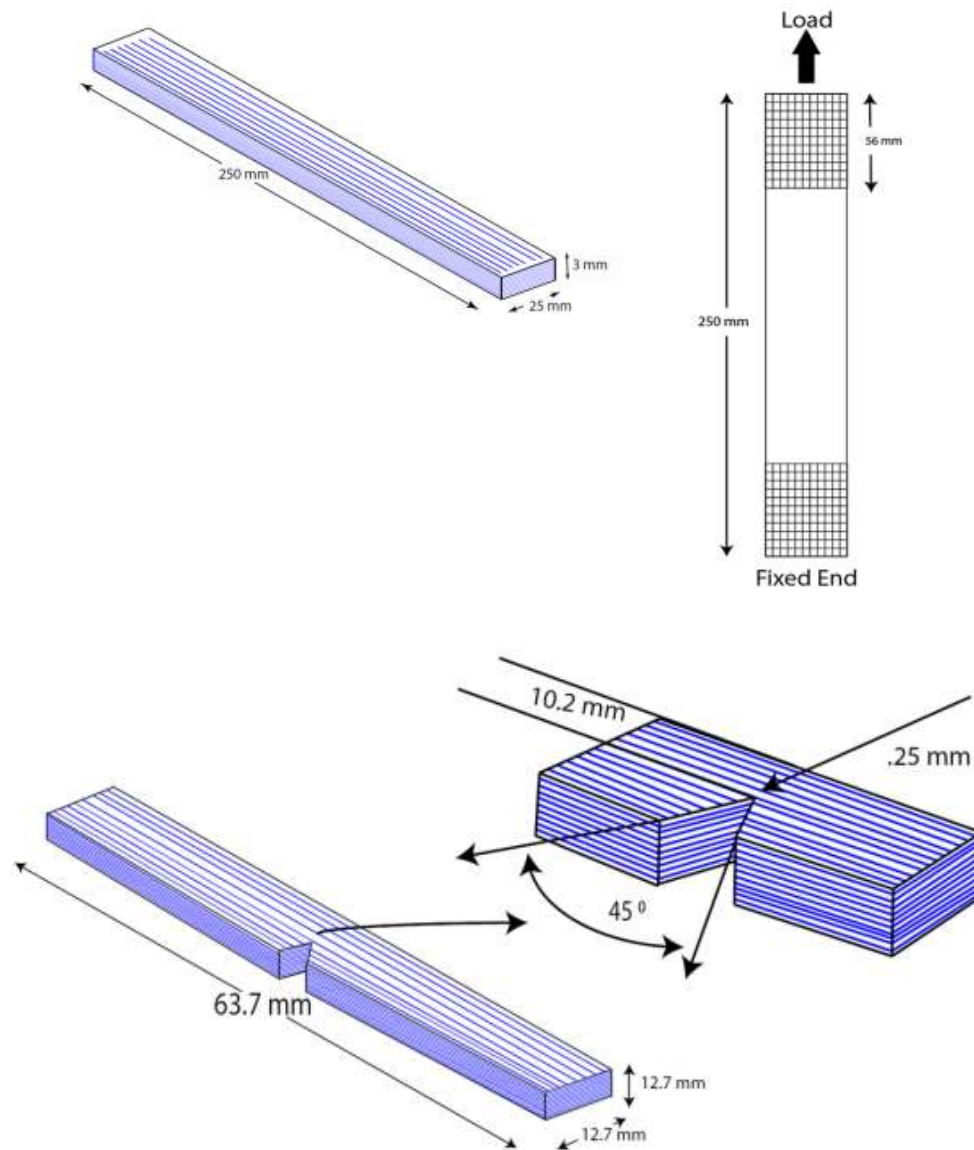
Tensile and Impact testing specimen dimensions and geometry as per ASTM standards
